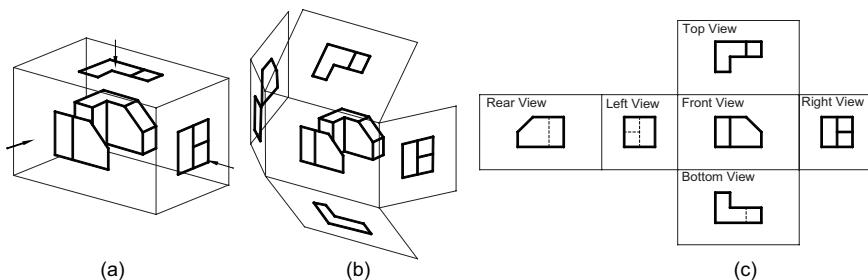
(a) Object kept in six-sided box (b) Unfold the box (c) Multi-view drawing in third angle
